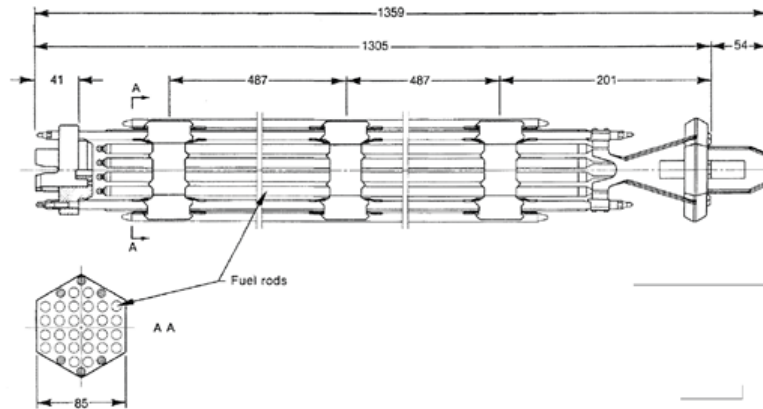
BR3 fuel assembly of 'go'-type, dimensions in mm, reproduced from [3]
